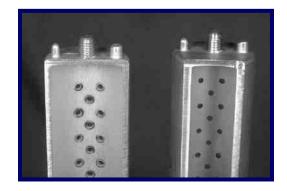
PASSENGER SIDE AIRBAG HOUSING (SECTIONS SHOWING DEBURRED HOLES)
